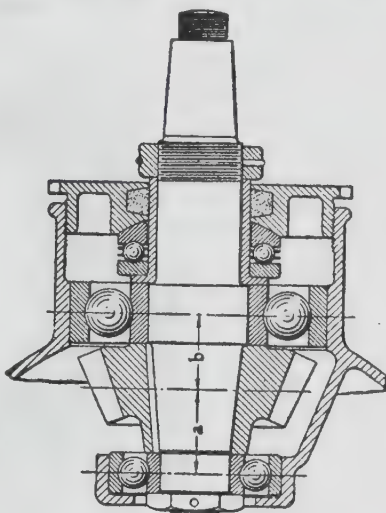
PINION SHAFT MOUNTING WITH SINGLE THRUST BEARING.
